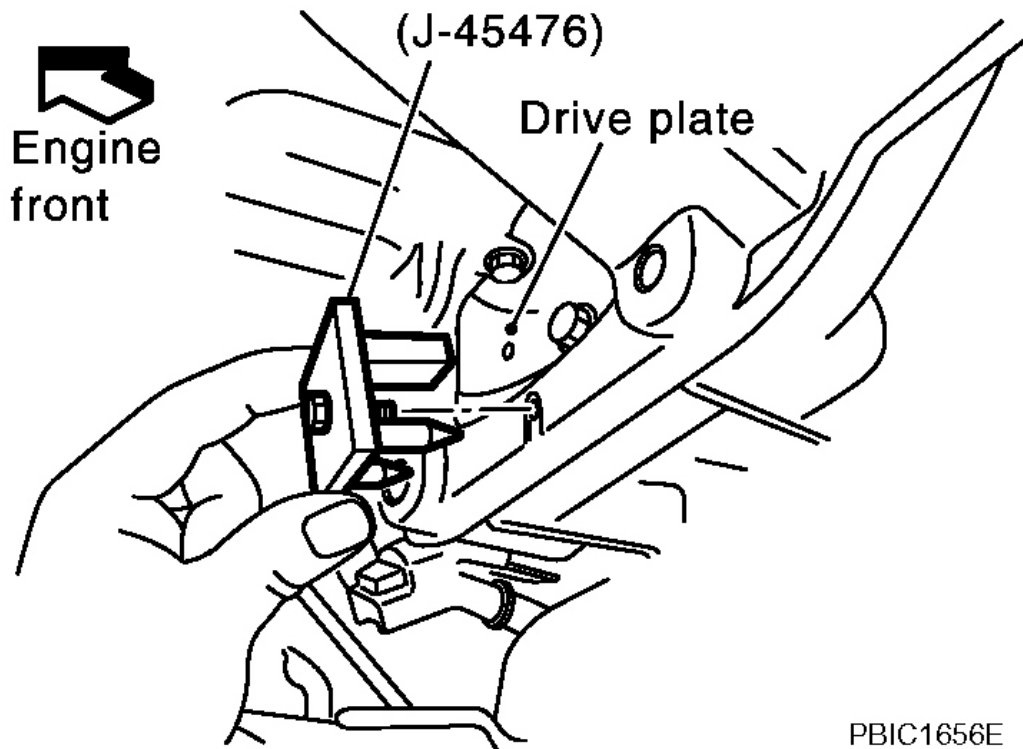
Holding Ring Gear With Ring Gear Stopper
